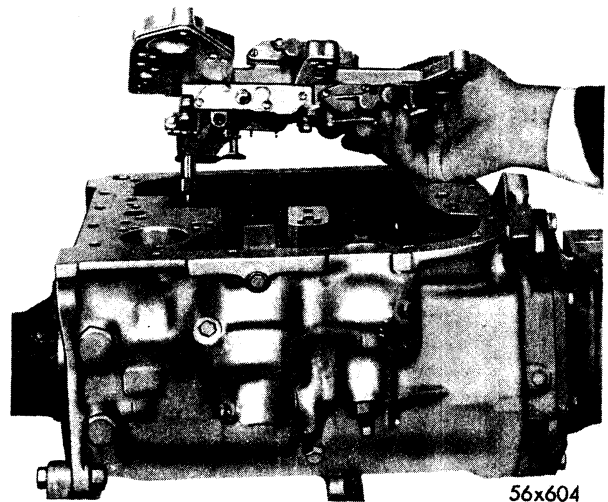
Removal and Installation of Valve Bodies and Transfer Plate Assembly (Typical View)
